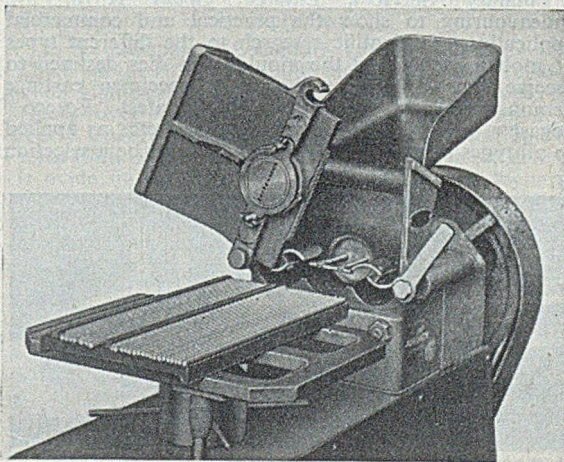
Multi-plunger Core Extrusion Machine by Fordath Engineering Company, Limited.
